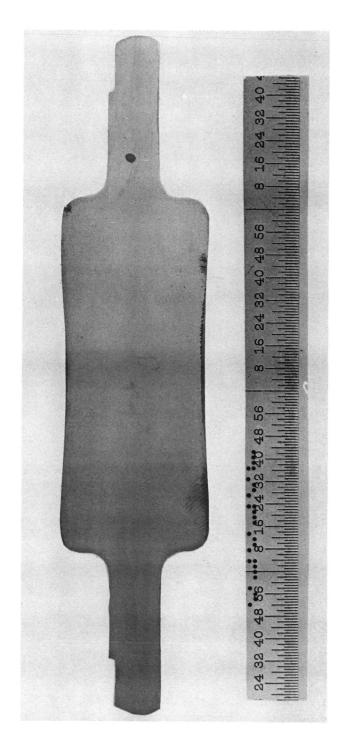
Cross Section Through Standard Forged M-50 Gear Blank
